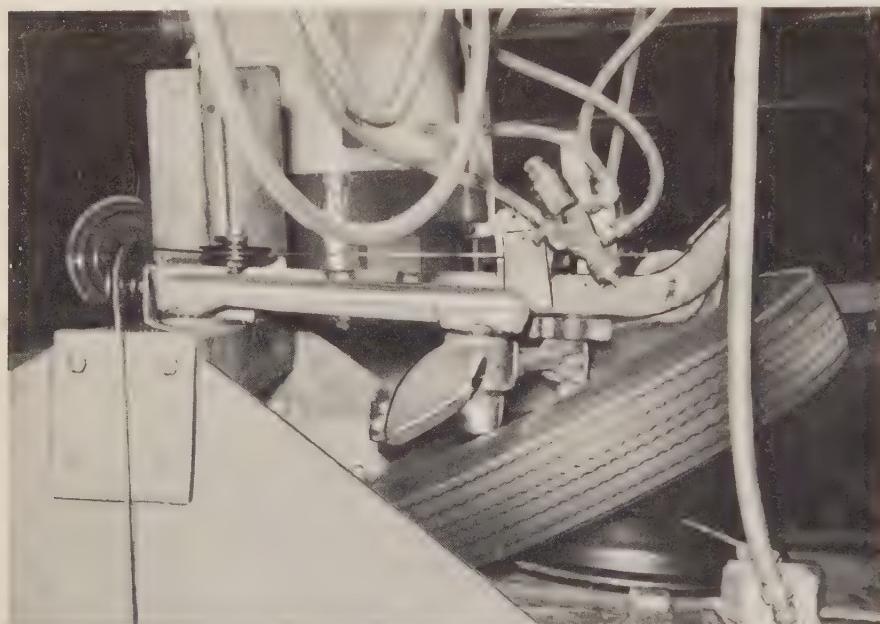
This machine, formerly used to mount 15-in. diameter tire sizes, had some 60 moving parts to accomplish the assembly operation. As the wheel rims and tires progressed along on the continuously moving conveyor, they were engaged by a pair of metal paddles which threaded the beads of the tire over the rim.
